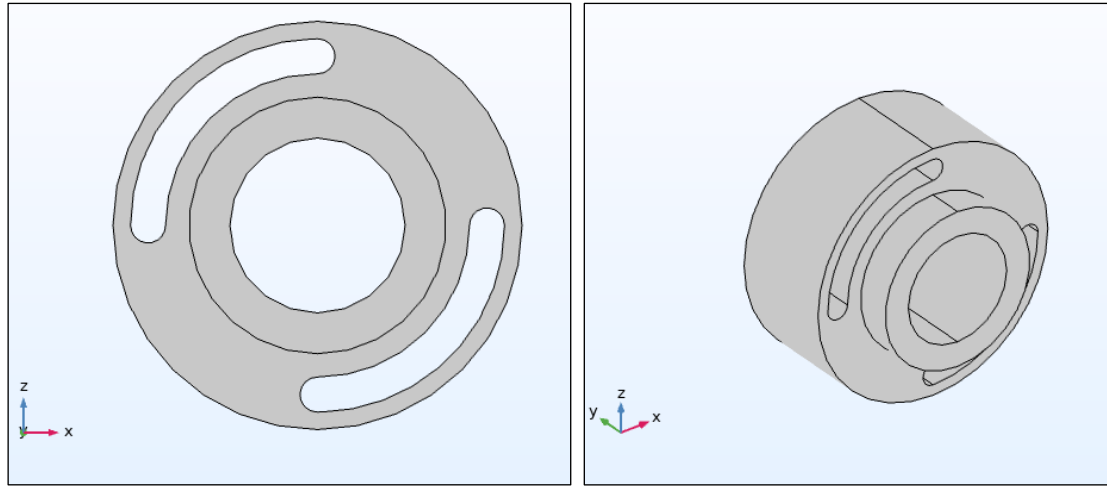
Slots made on the external insulating washers; front view (left) and isometric view (right)
